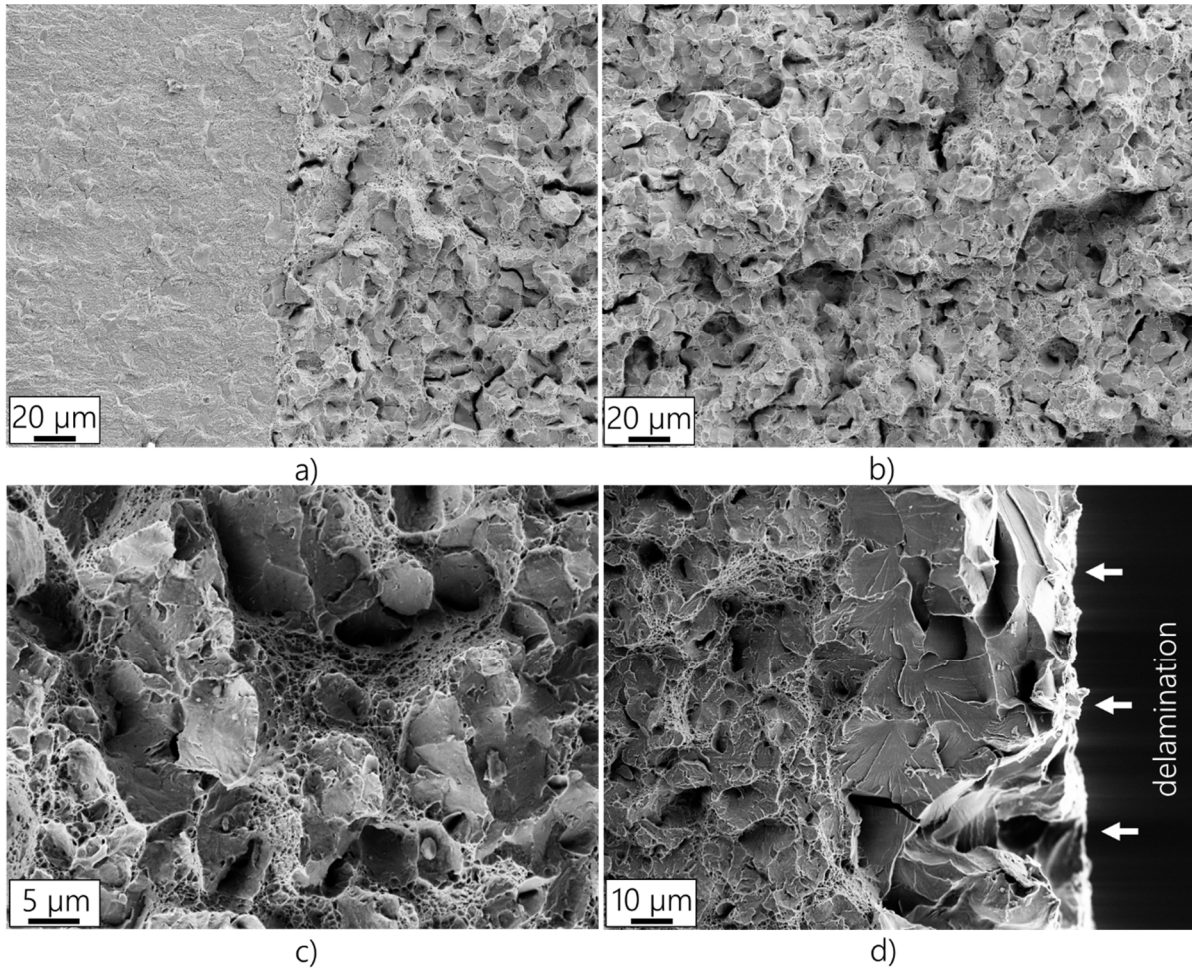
Details of the fracture surface of a C45/DC04 composite with a single 55 μm thick interlayer. a) Transition between fatigue and fracture, b) and c) fracture of the matrix and d) part of the interlayer fractured by cleavage.
